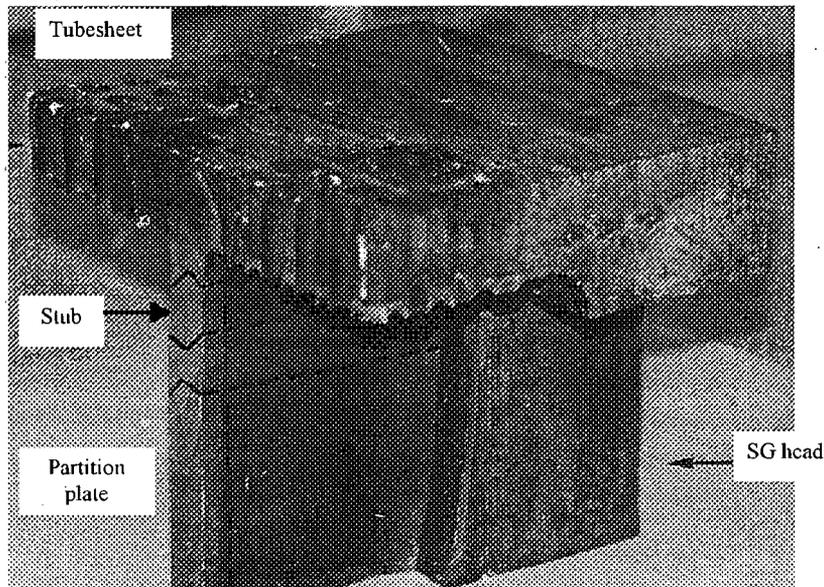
Destructive Examination Specimen from Existing SG Showing Triple Point Connections.
